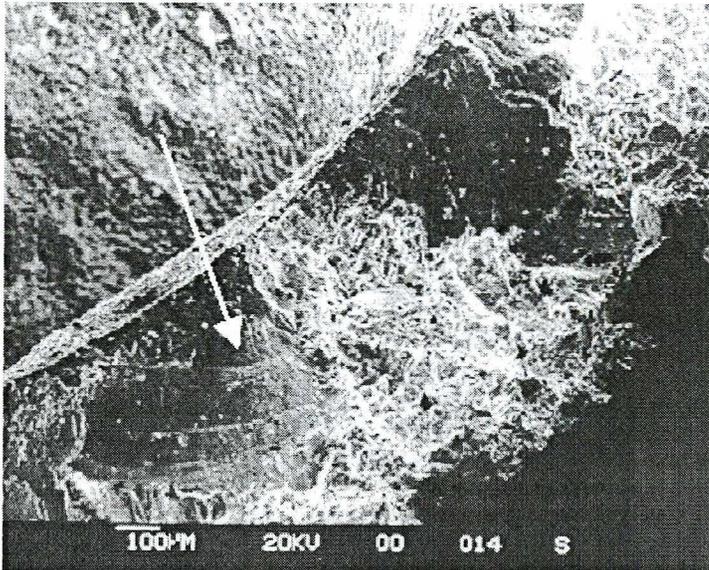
Microscope photo of the fatigue fracture in the high-pressure turbine blade (by [1])
